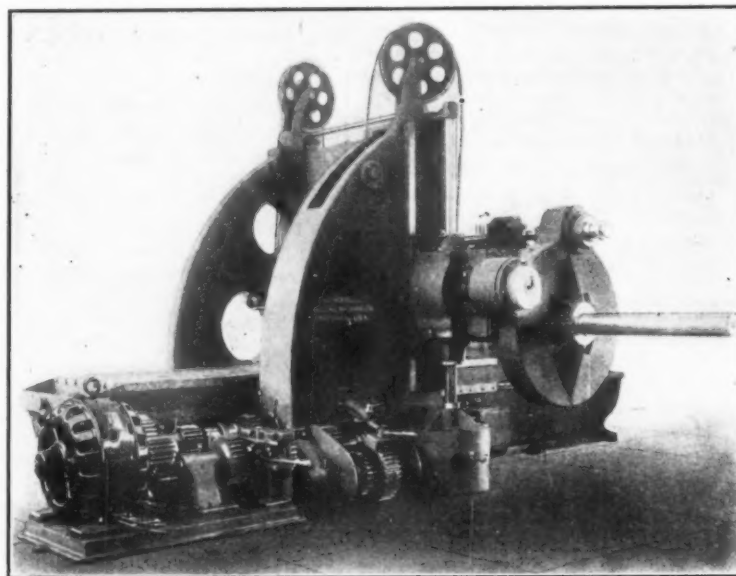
ELECTRIC-DRIVEN MILLING MACHINES.
